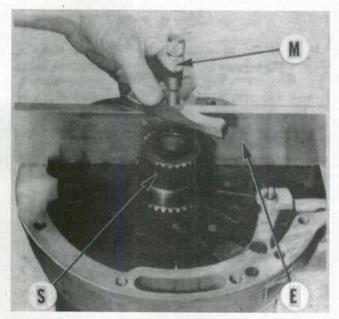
Use a depth gage (M) and straightedge (E) to determine distance brake shaft (S) projects beyond face of brake housing. Refer to text for brake shaft to output shaft end clearance setting.
